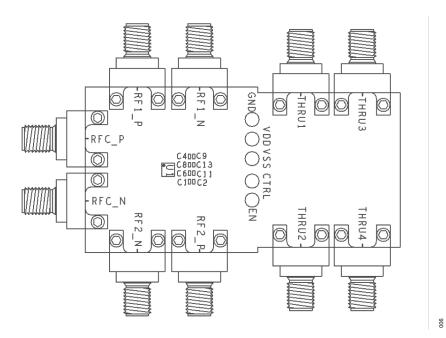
ADRF5062-EVALZ Evaluation Board Assembly Diagram
